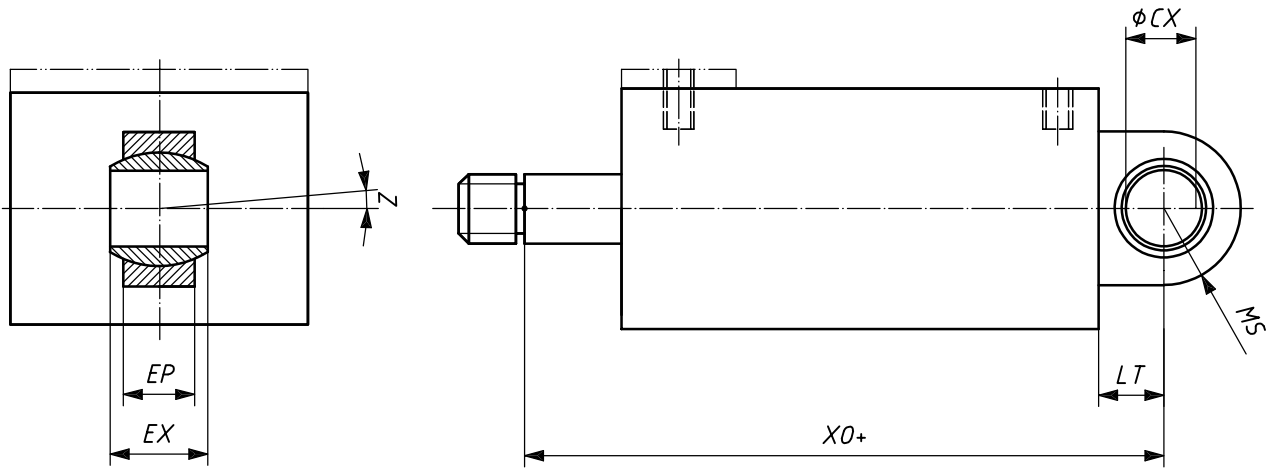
MP 5 — Cap, fixed eye with spherical bearing
